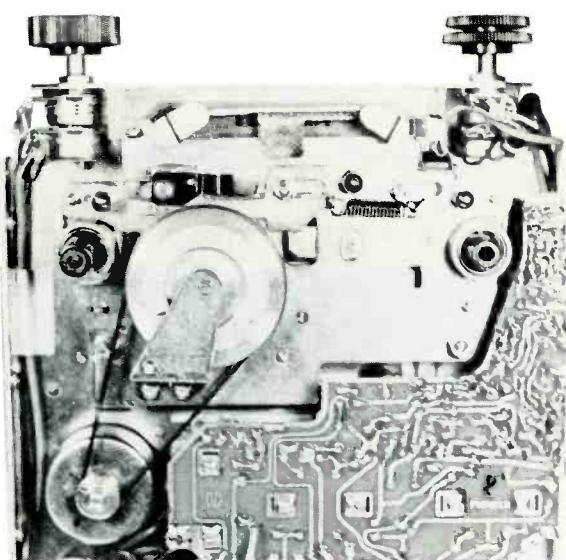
Bottom view of Craig Model 3501 cassette tape player, which employs a belt between the motor pulley and the flywheel, but uses idler wheels to drive the take-up sprocket.
